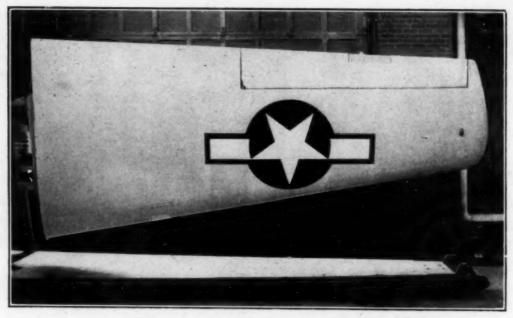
Wing Made from J-1h Alloy Sheet and O-1HTA Extrusions.
